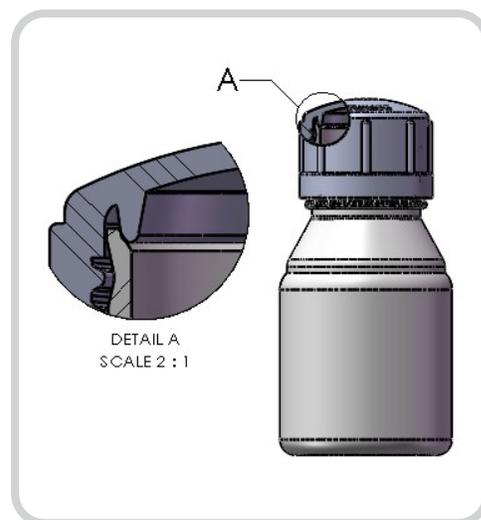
Injection Molded Bottle and Closure Ensures Precise Engagement and Closure Integrity
